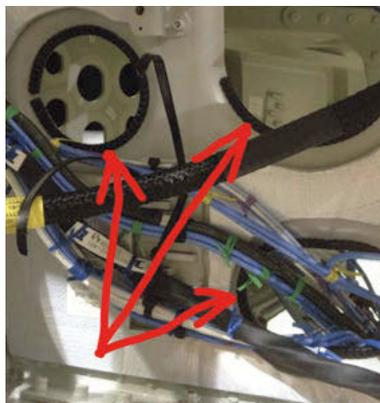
An extensive network of cables is hidden in walls, floors and ceilings, sometimes in very confined spaces
